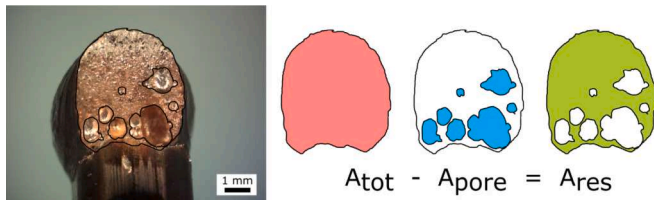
Schematic description of the porosity and the effective resistant section measurements taken on the fracture surfaces.
